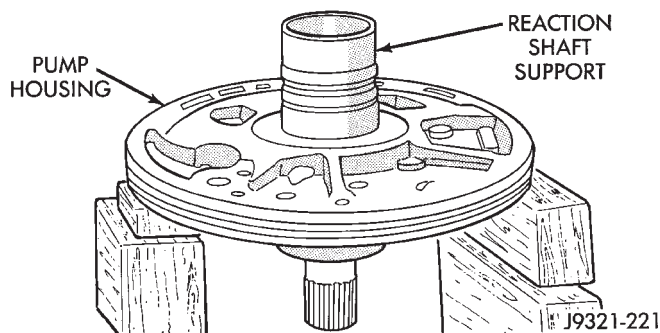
Assembling Reaction Shaft Support And Pump Housing
